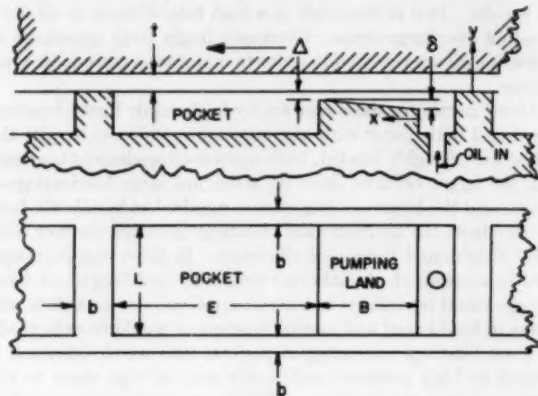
SECTION AND PLAN VIEW OF ONE SECTOR OF HYDRODYNAMIC POCKET THRUST BEARING
